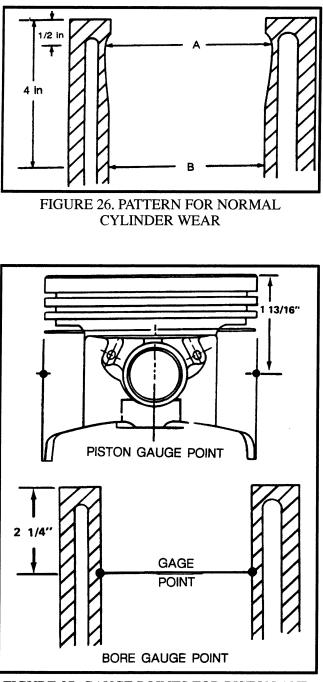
GAUGE POINTS FOR PISTON AND CYLINDER BORE
